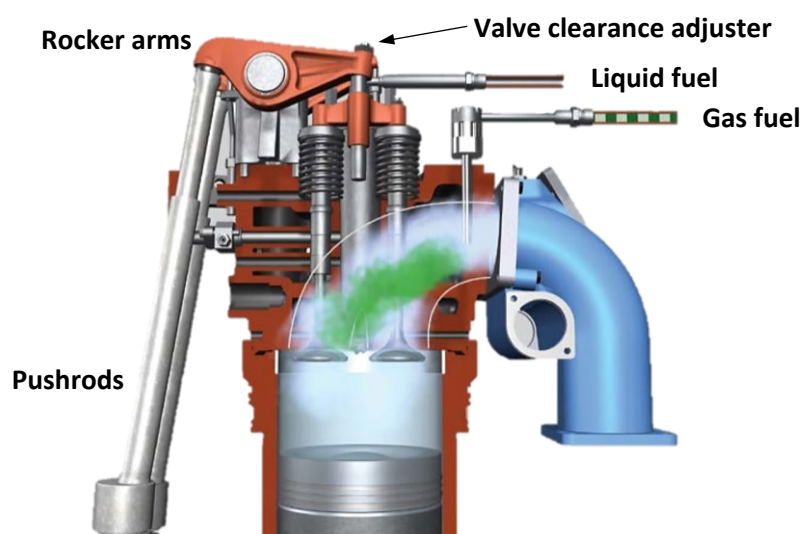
Valve train mechanism in dual-fuel engine (Wärtsilä). Adapted from [26].
